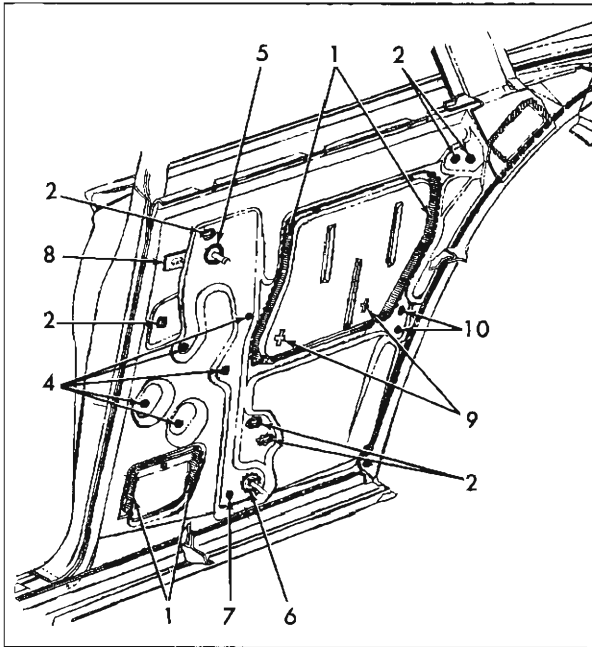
Inner Panel Sealing—Electric "11" Style
